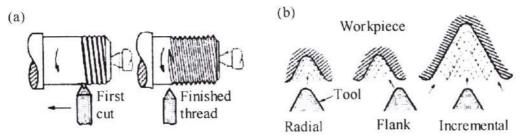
(a) Cutting screw threads on a lathe with a single-point cutting tool. (b) Cutting screw threads with a single-point tool in several passes. This process is normally utilized for large threads.
